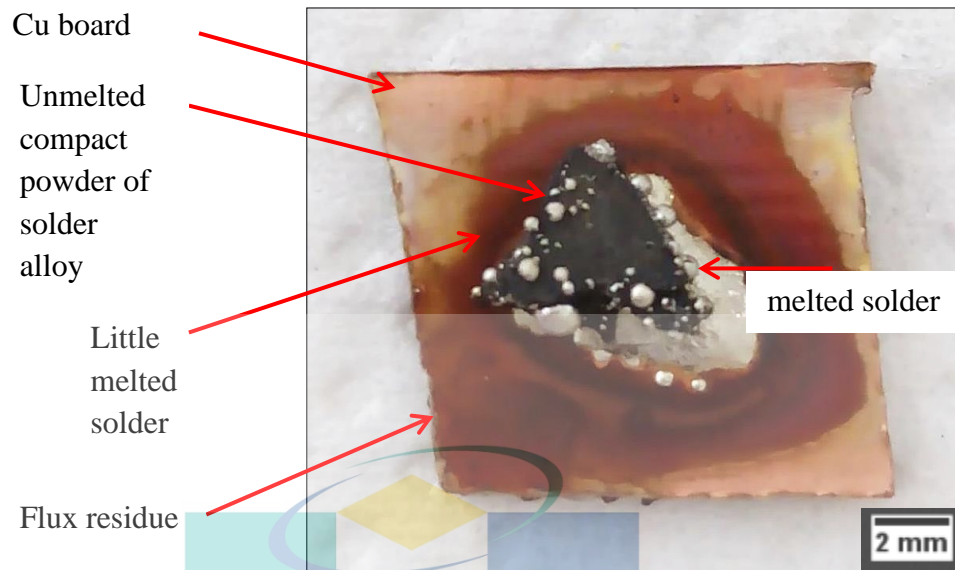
The melted solder, the unmelted and the small amount of melted solder on top of unmelted after reflow soldering the Sn3.0Ag0.5Cu milled powder
